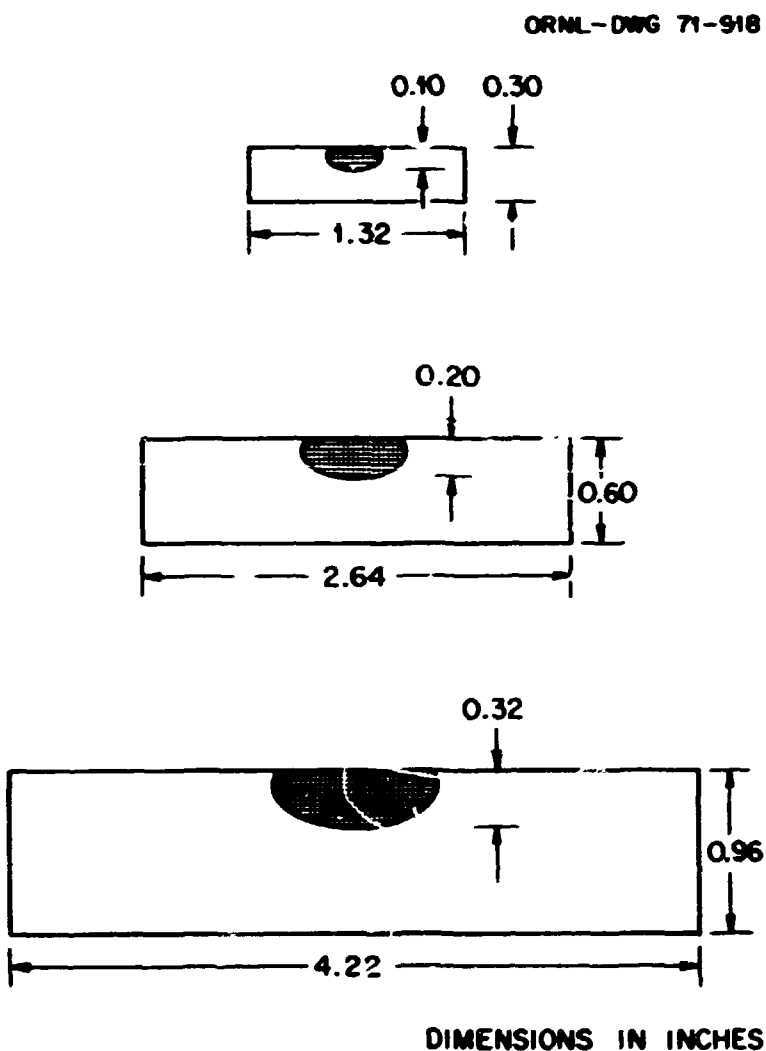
Specimen cross sections to be studied in size-effect tests.
